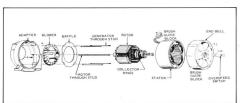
REVOLVING FIELD GENERATOR ASSEMBLY
